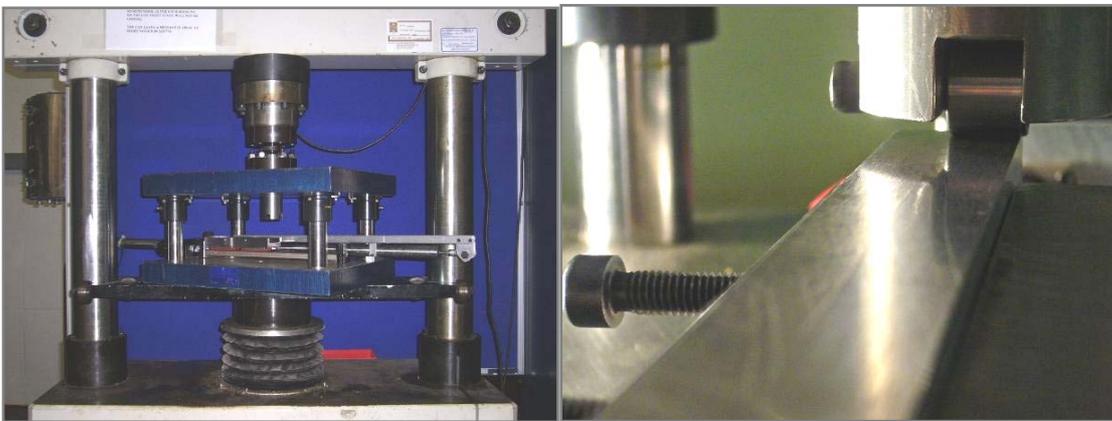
Burnishing apparatus left and closeup of the burnishing tool
